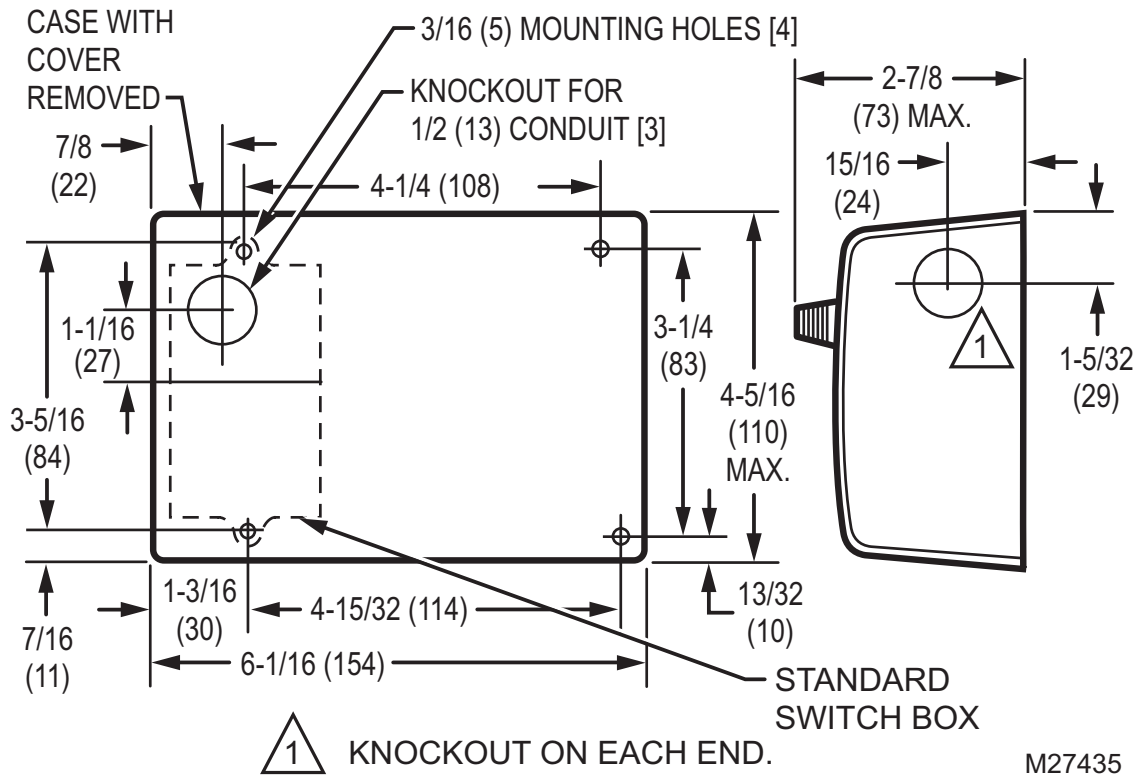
T631 installation dimensions, in in. (mm shown in brackets)
